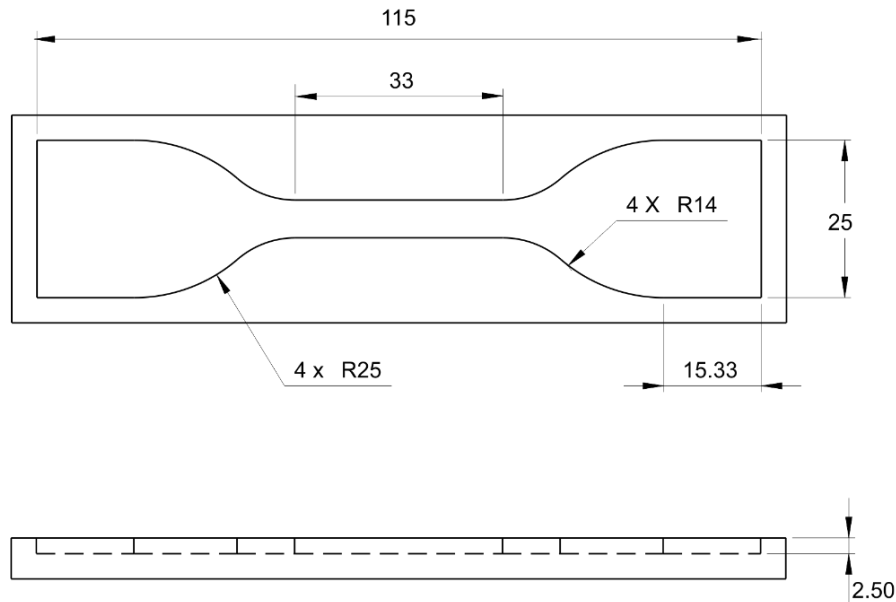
2D drawings of the mould used for the fabrication of the specimen for uniaxial tensile tests.
